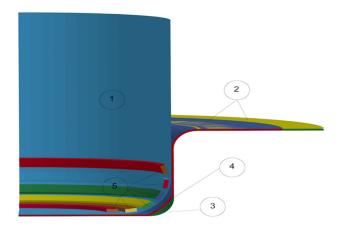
Example of a process chain combining deep drawing and EMF: (1) punch, (2) blank holder, (3) die, (4) work piece, (5) tool coils (CAD model by Kiliclar, IFAM, Aachen)
